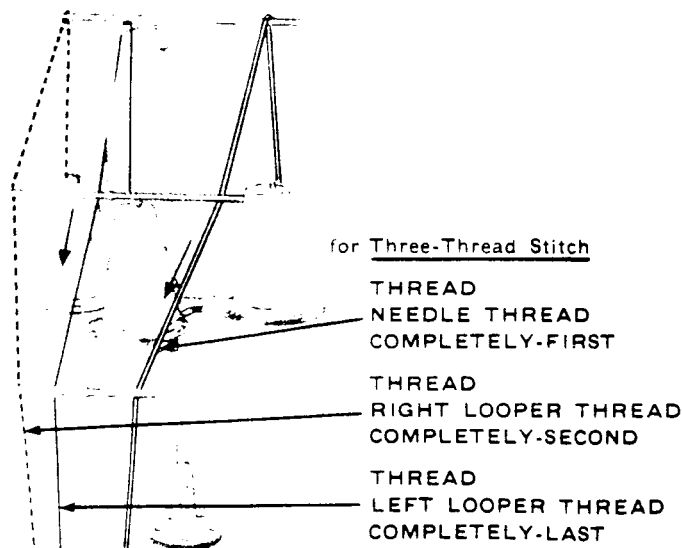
Unwinder 81443 Threaded for Three-Thread Stitch
